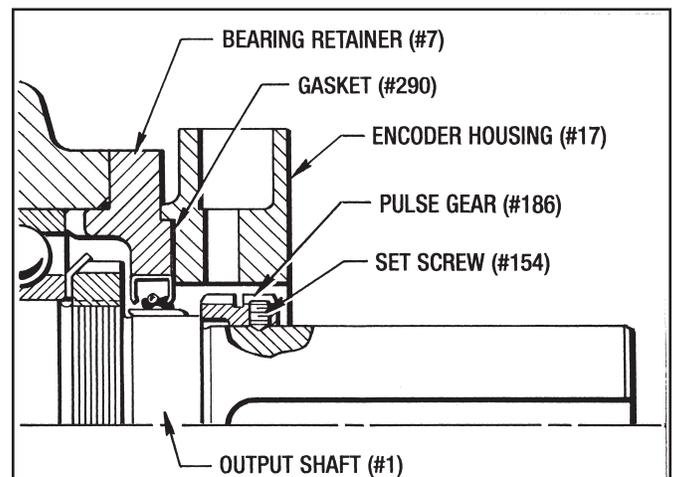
Pulse Gear Alignment (#11 Posidyne)
